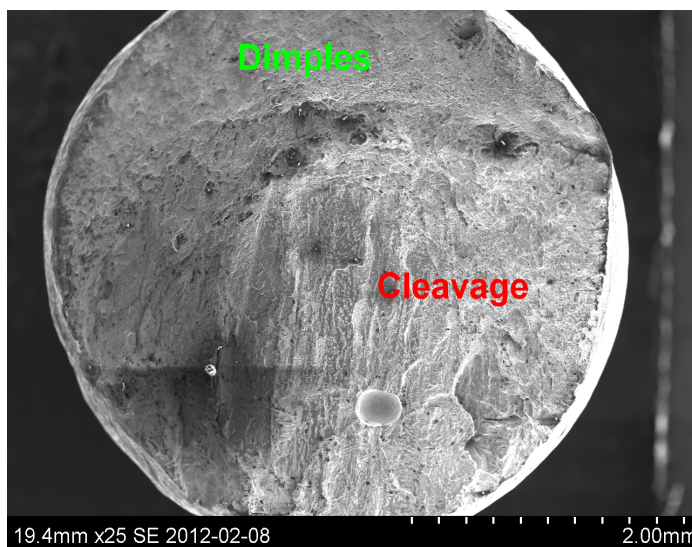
Fracture section of 5Ni\_root cross weld at -20°C
